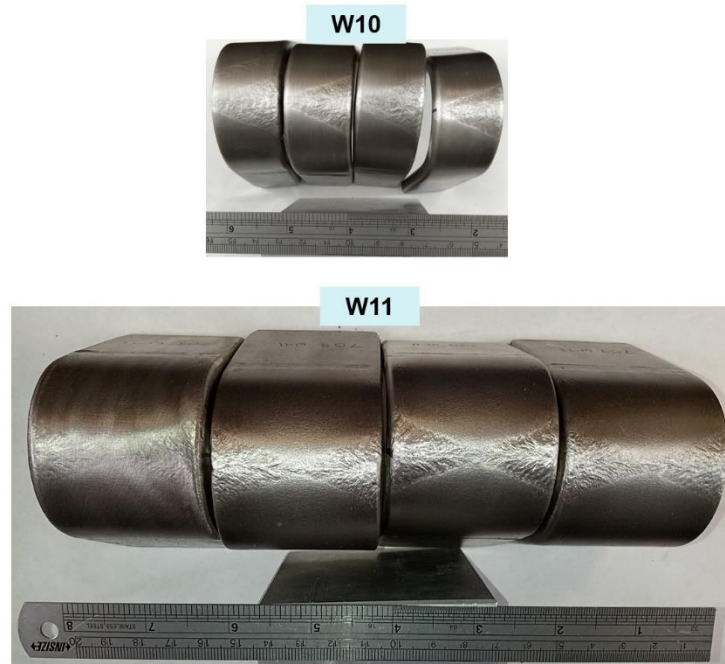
Photographs of the side-bend specimens of the production welds after testing
